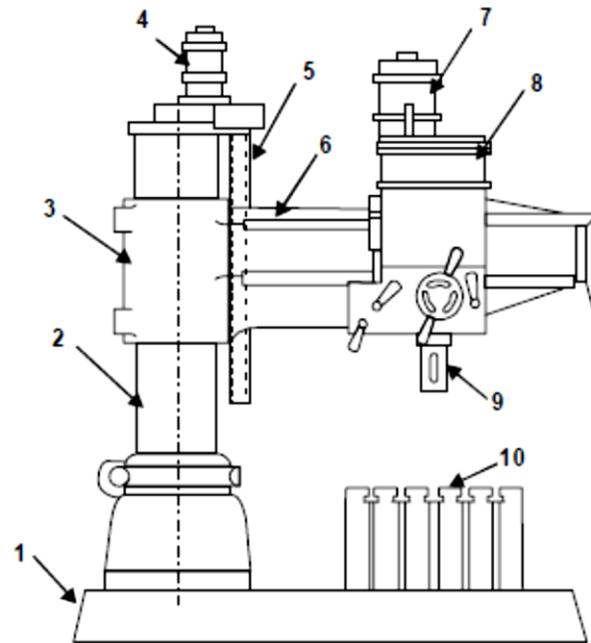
illustrates a radial drilling machine. The radial drilling machine consists of a heavy, round vertical column supporting a horizontal arm that carries the drill head. Arm can be raised or lowered on the column and can also be swung around to any position over the work and can be locked in any position. The drill head containing mechanism for rotating and feeding the drill is mounted on a radial arm and can be moved horizontally on the guide-ways and clamped at any desired position. These adjustments of arm and drilling head permit the operator to locate the drill quickly over any point on the work. The table of radial drilling machine may also be rotated through 360 deg. The maximum size of hole that the machine can drill is not more than 50 mm. Powerful drive motors are geared directly into the head of the machine and a wide range of power feeds are available as well as sensitive and geared manual feeds. The radial drilling machine is used primarily for drilling medium to large and heavy work pieces. Depending on the different movements of horizontal arm, table and drill head, the upright drilling machine may be classified into following types-
